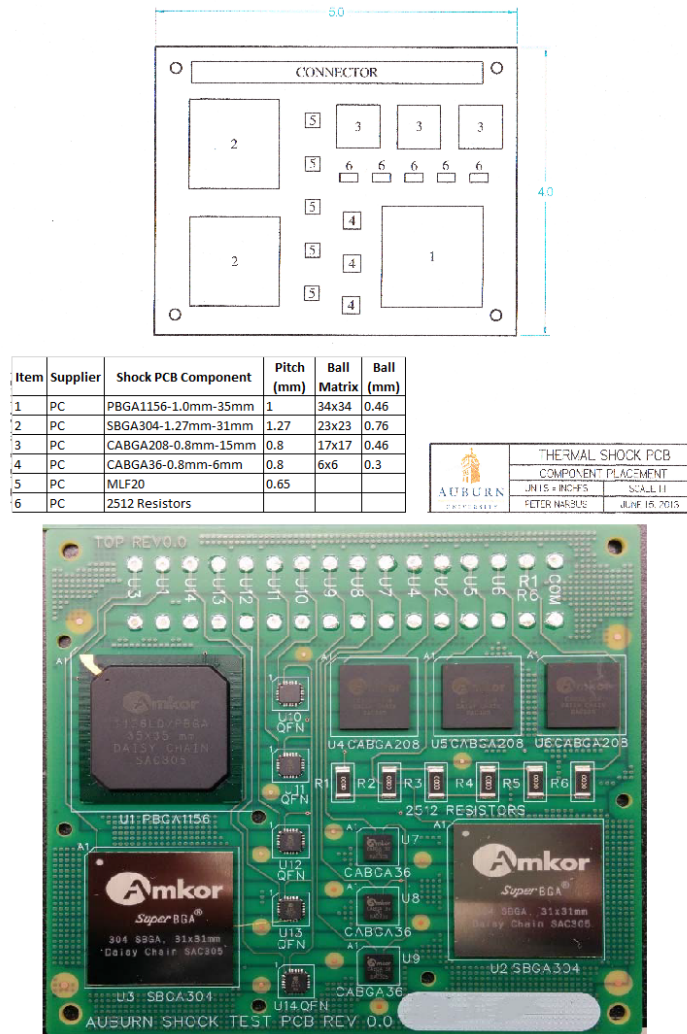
Thermal shock board design (top), assembled board (bottom)
